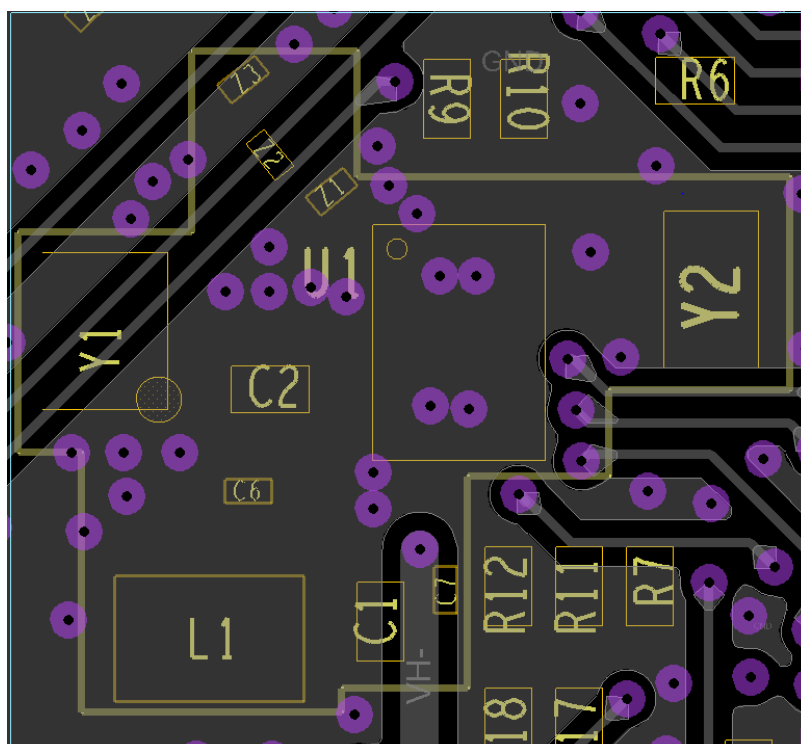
FCGQFN24 PCB Placement and Routing – INT2 Layer
